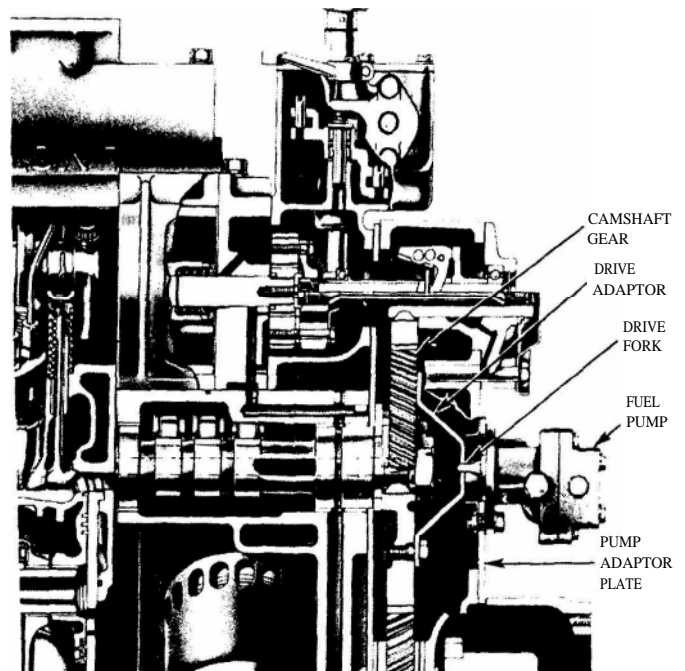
Camshaft drive for fuel pump (6V engine shown).
